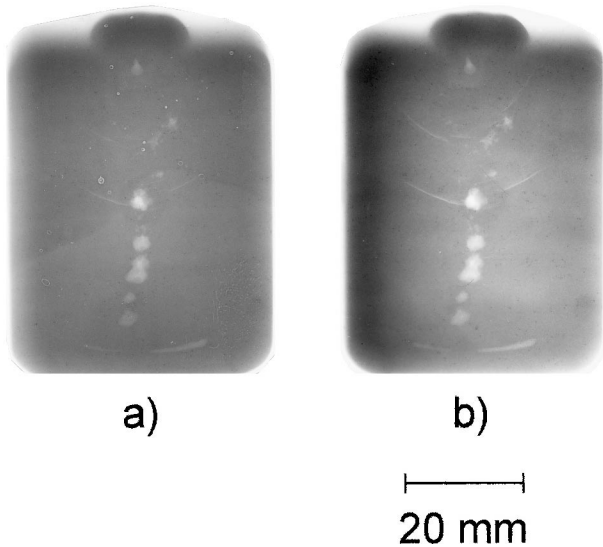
X-ray radiographs of 25 mm thick conventional mouldings: (a) as moulded and (b) after heat treatment.
